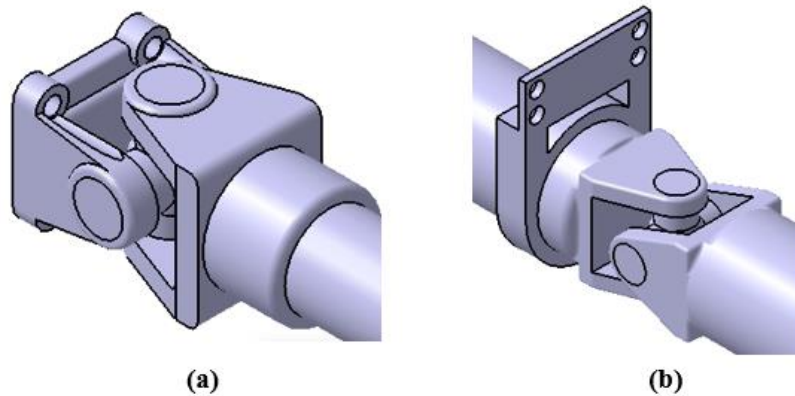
(a) Universal joint at the front and (b) the intermediate universal joint
